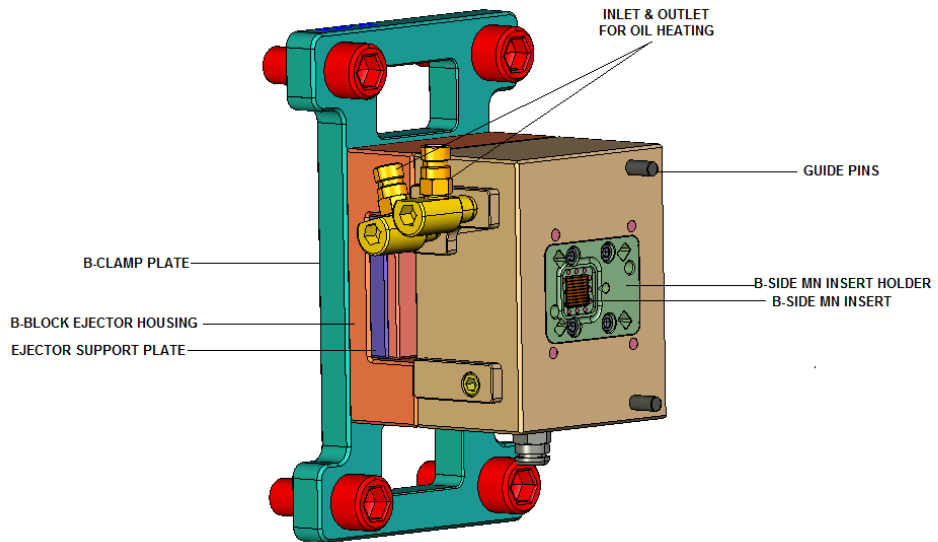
Labelled 3D technical drawing showing various components of the B-side of the mould assembly.
